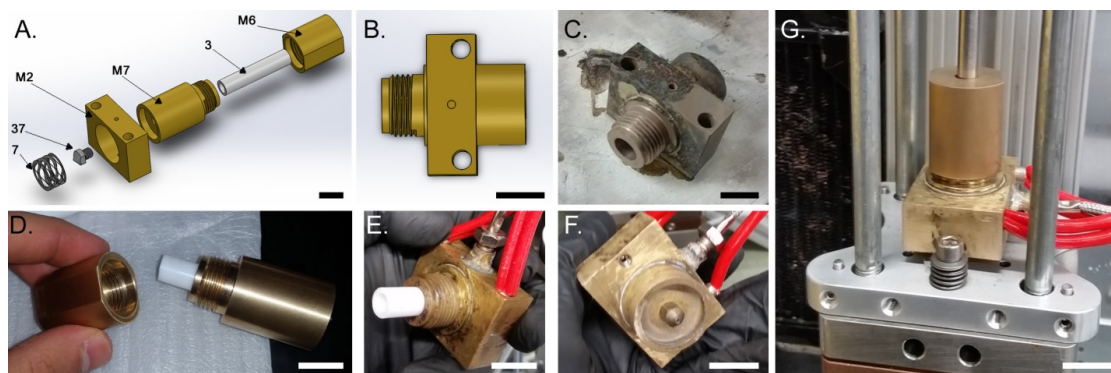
Photographs and computer aided drafting models of the heated barrel and assembly procedure. All scale bars: 15 mm.
